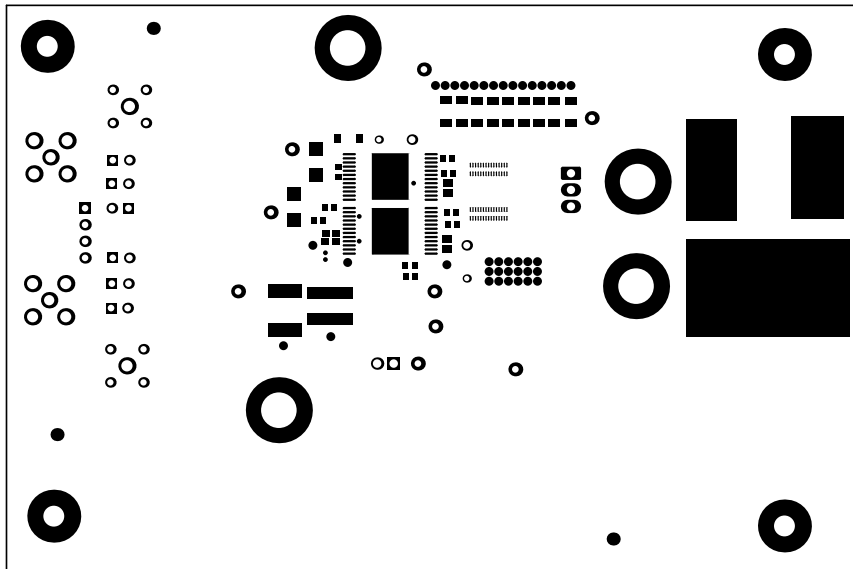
Top Solder Mask (TPS7H6023EVM-CVAL)
